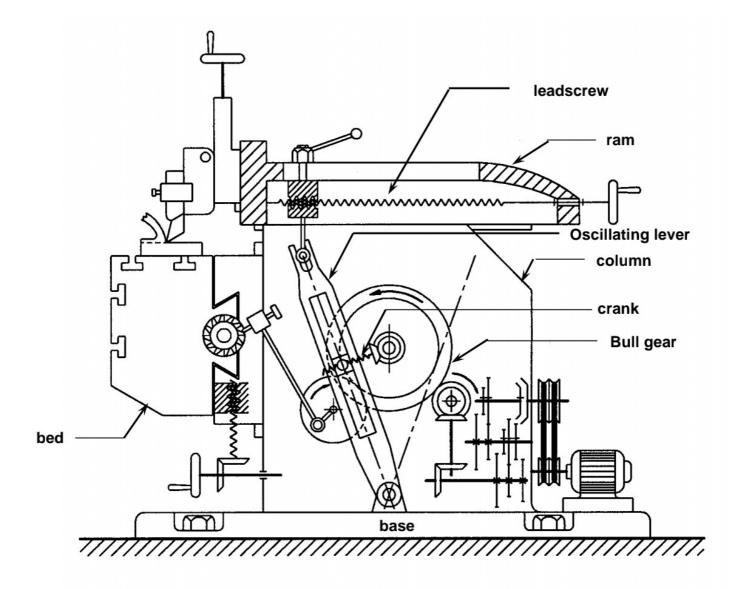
Kinematic diagram of a shaping machine.
